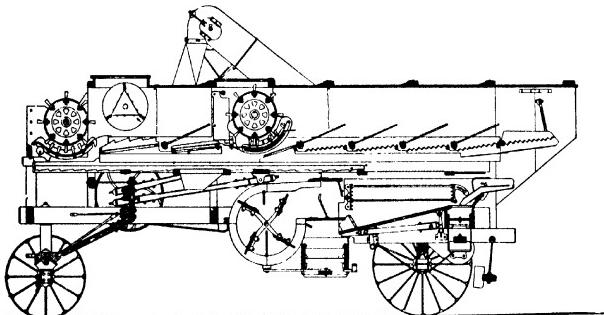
Sectional view of a bean thresher showing both cylinders.
